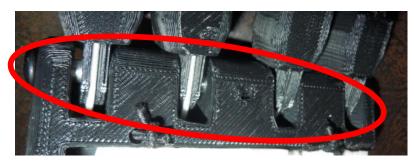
Knuckle Chicago Screw (3" to 3 1/4" or larger)
